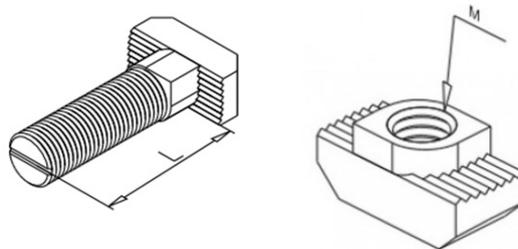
Aluskit Hammer head bolt and nut (Stainless steel, A4-50)
